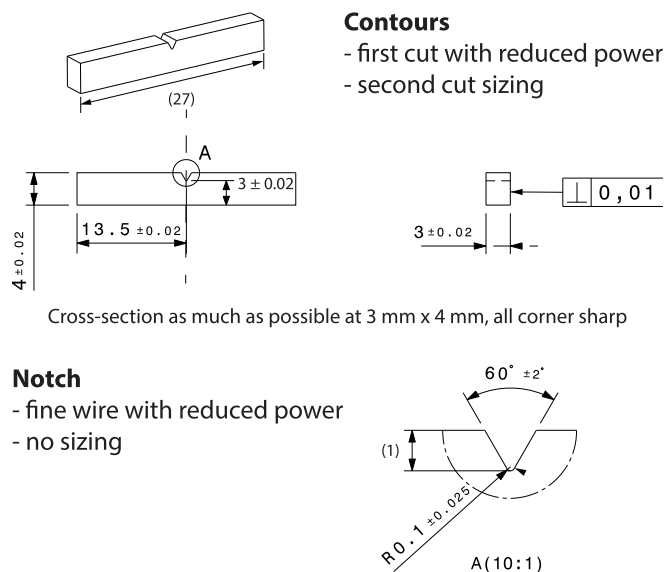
Geometry of KLST type samples and details of parameters for electrical discharge machining.
